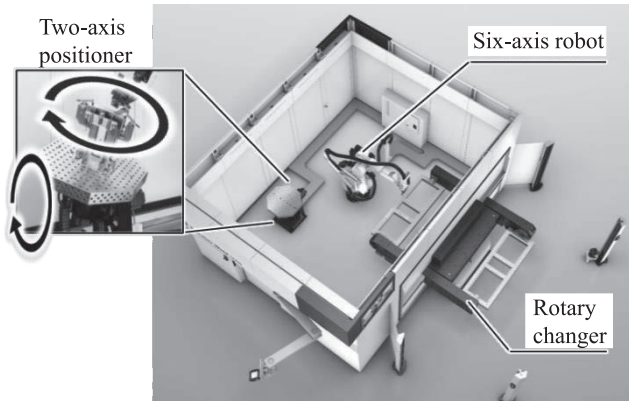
Layout of constructed laser welding system with a robot.
